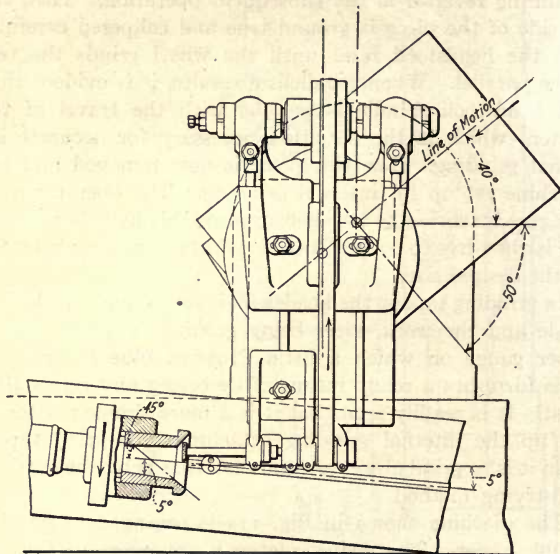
Grinding a double internal taper on a Brown & Sharpe universal grinding machine set up for internal work.
